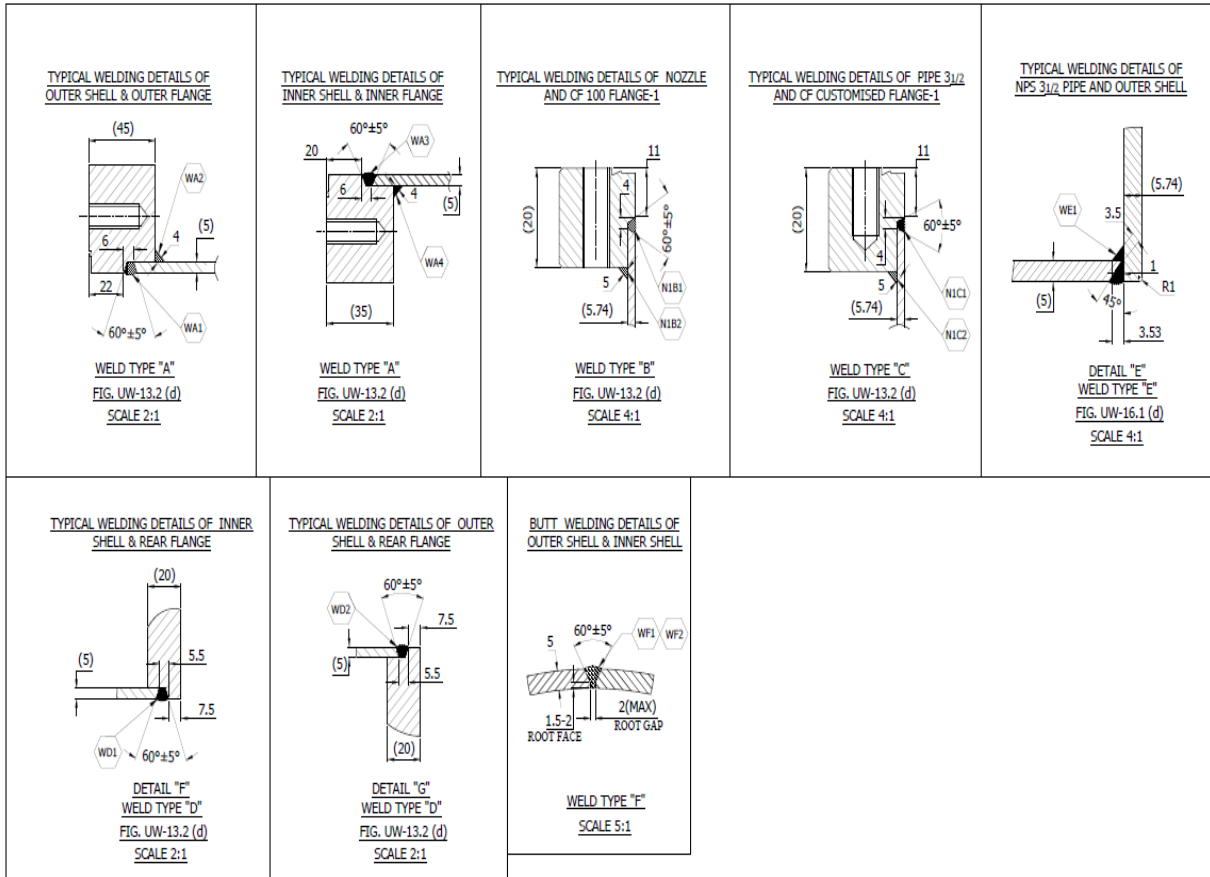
weld joints details in nitrogen chamber[1]
